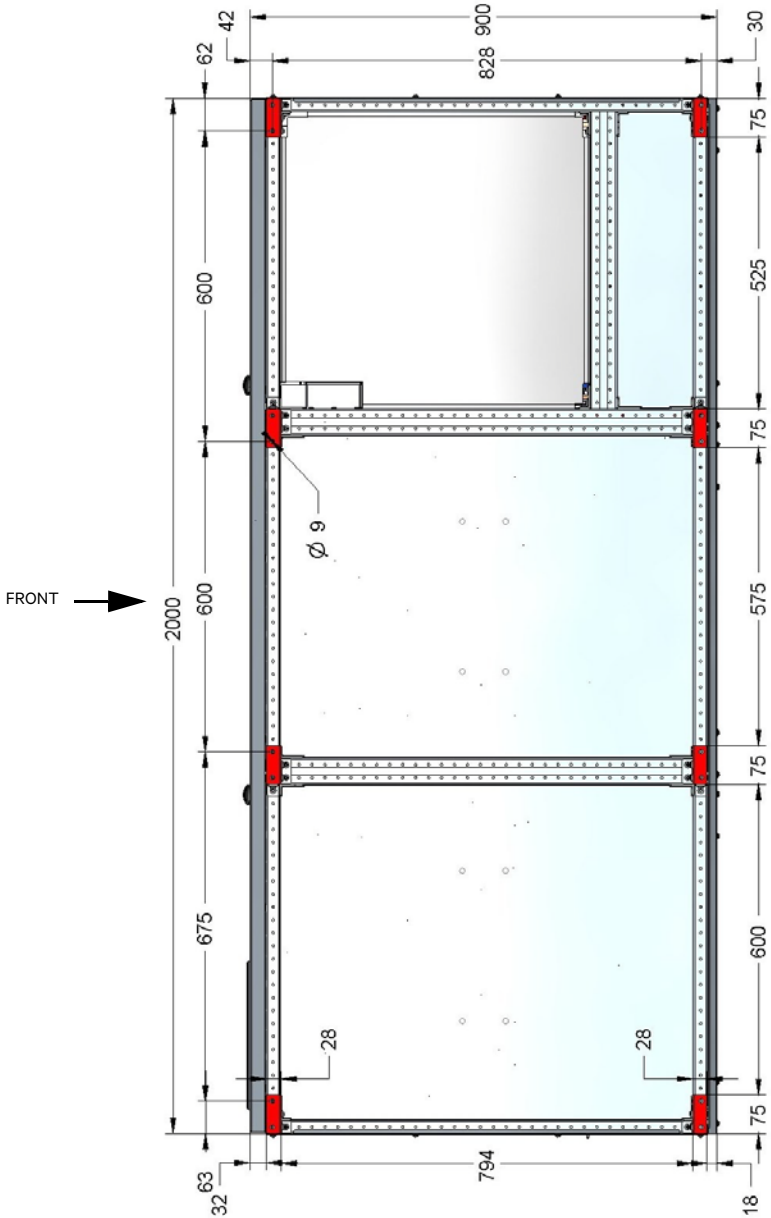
Liebert EXL S1 600/800kVA bottom view (footprint and floor mounting holes)
